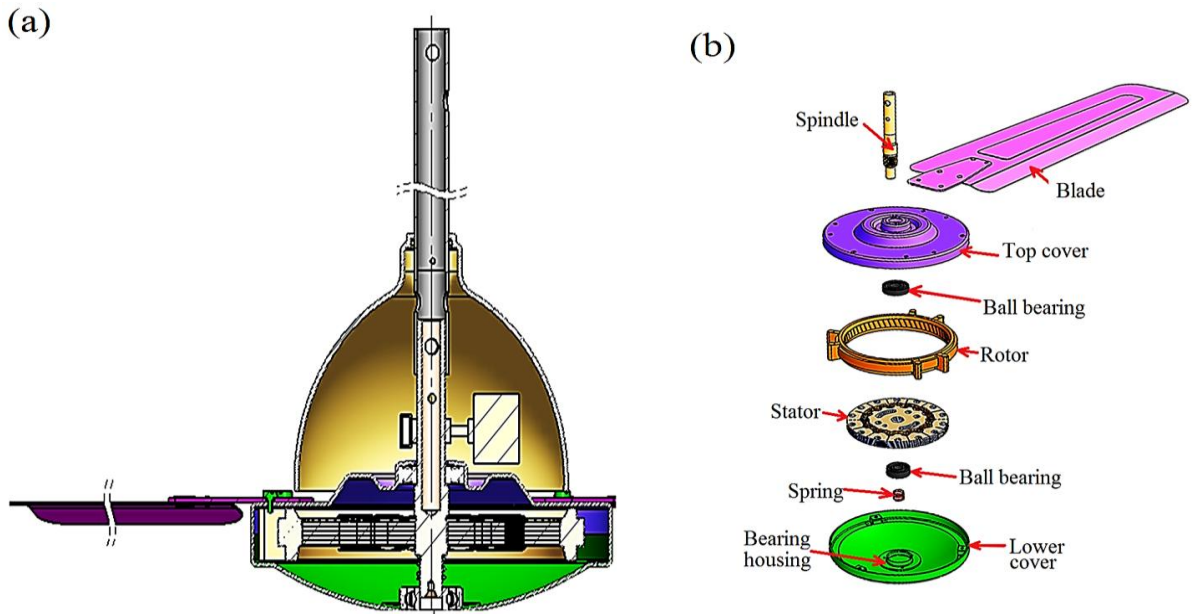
(a) Sectional view of the ceiling fan assembly showing bearing locations; (b) exploded view of the ceiling fan components.
